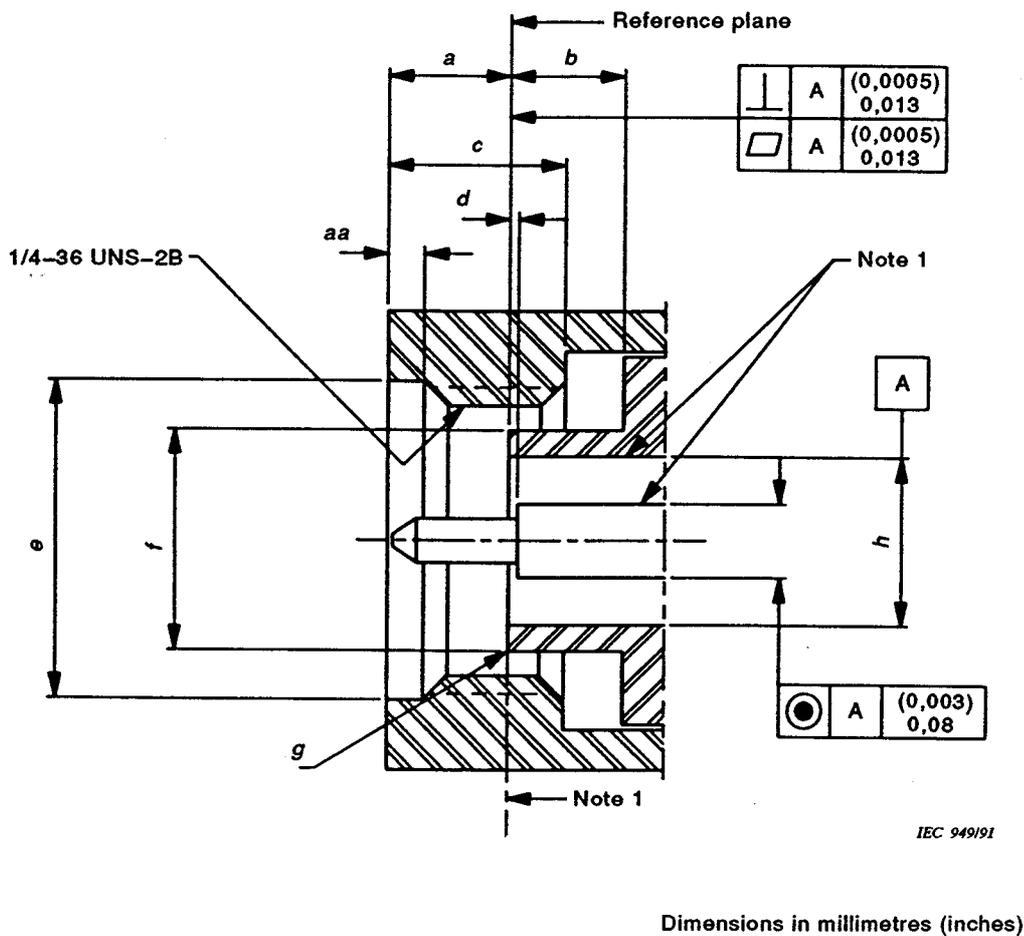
Plug connector (for dimensions, see table 1 which follows)
